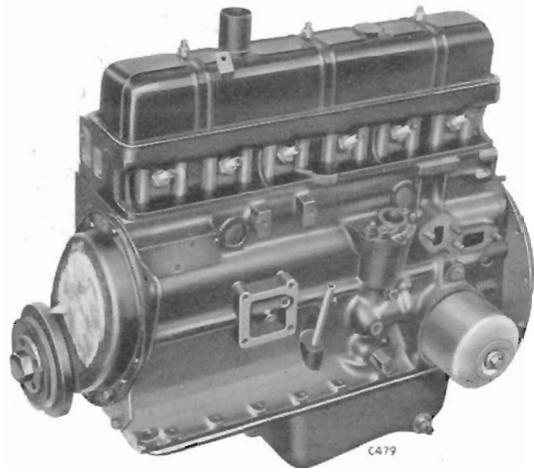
Left-hand front view of Vitesse reconditioned unit
